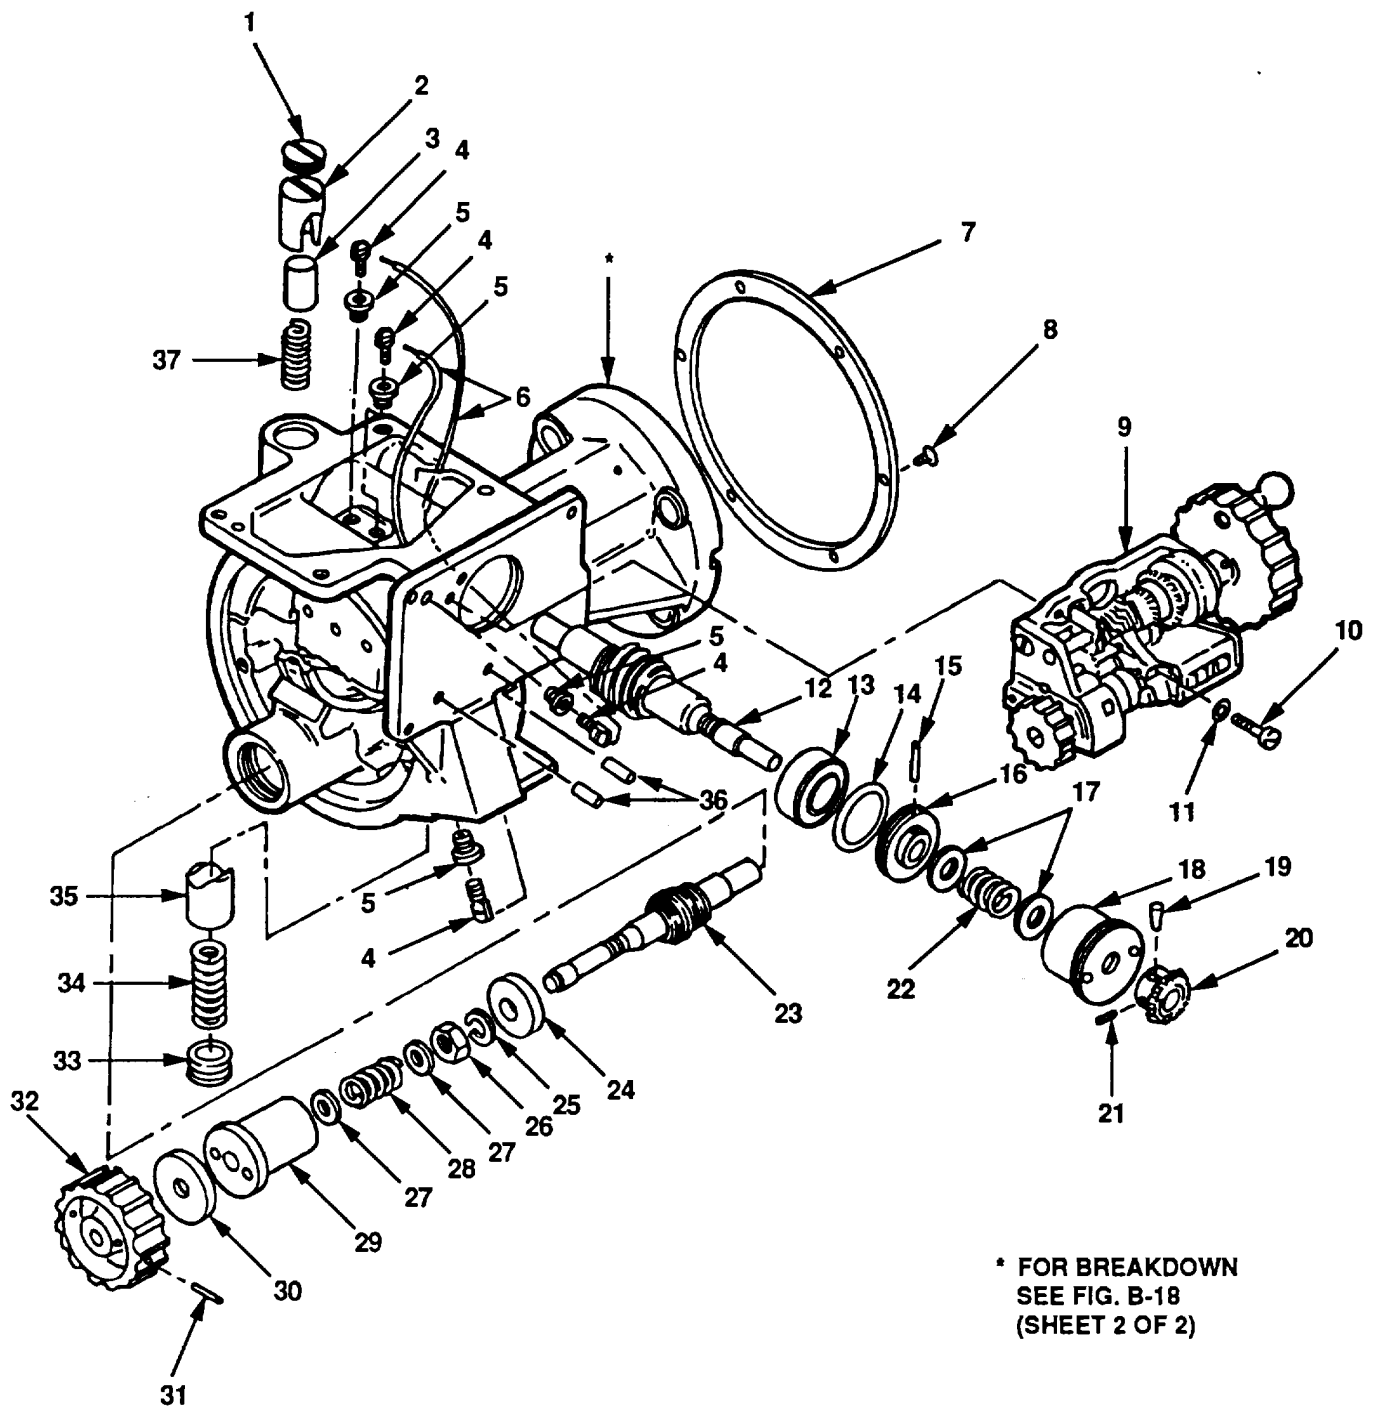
Mount Subassembly, Telescope, Lower Assembly 8572222
